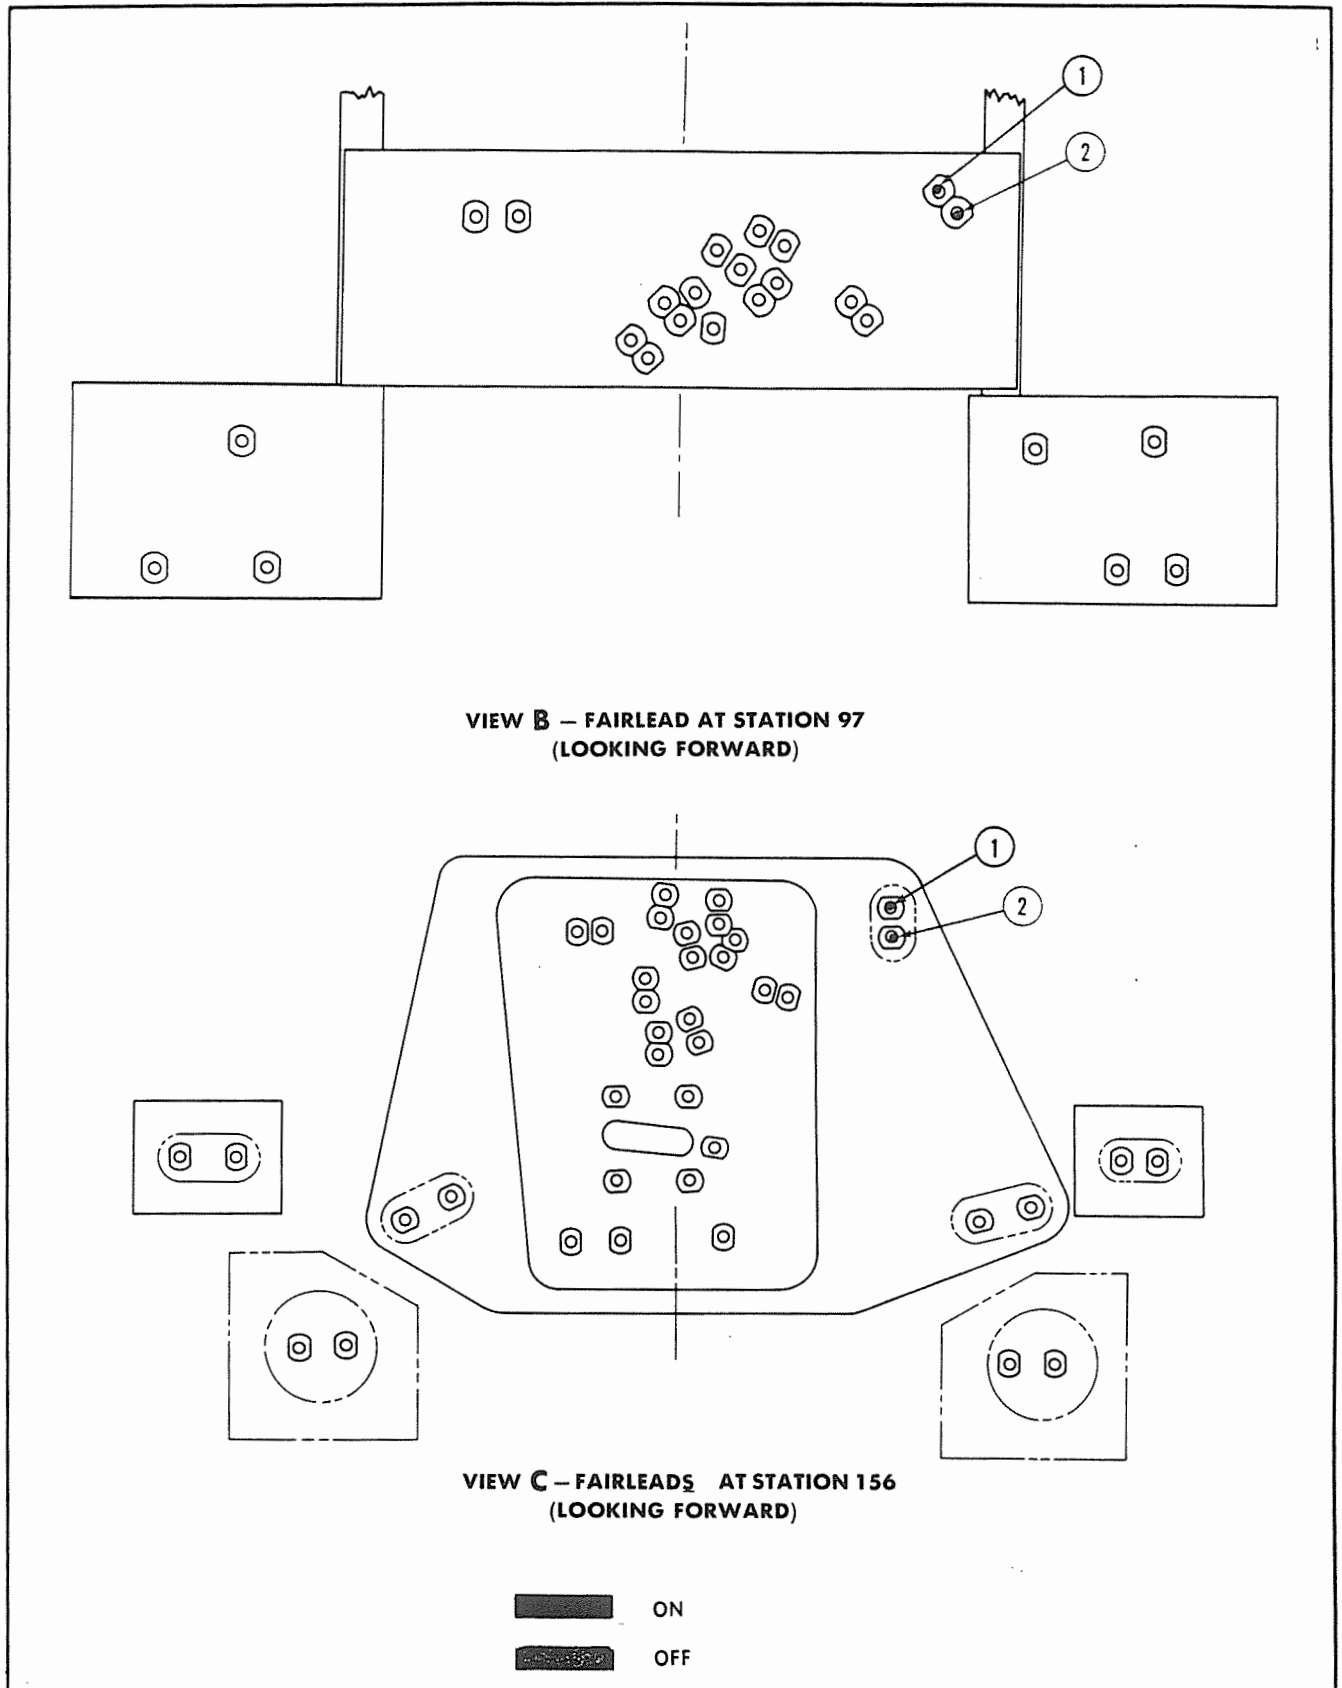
(Sheet 2 of 4 Sheets). Surface De-Icing Control System — Fairleads, Stations 97 and 156
